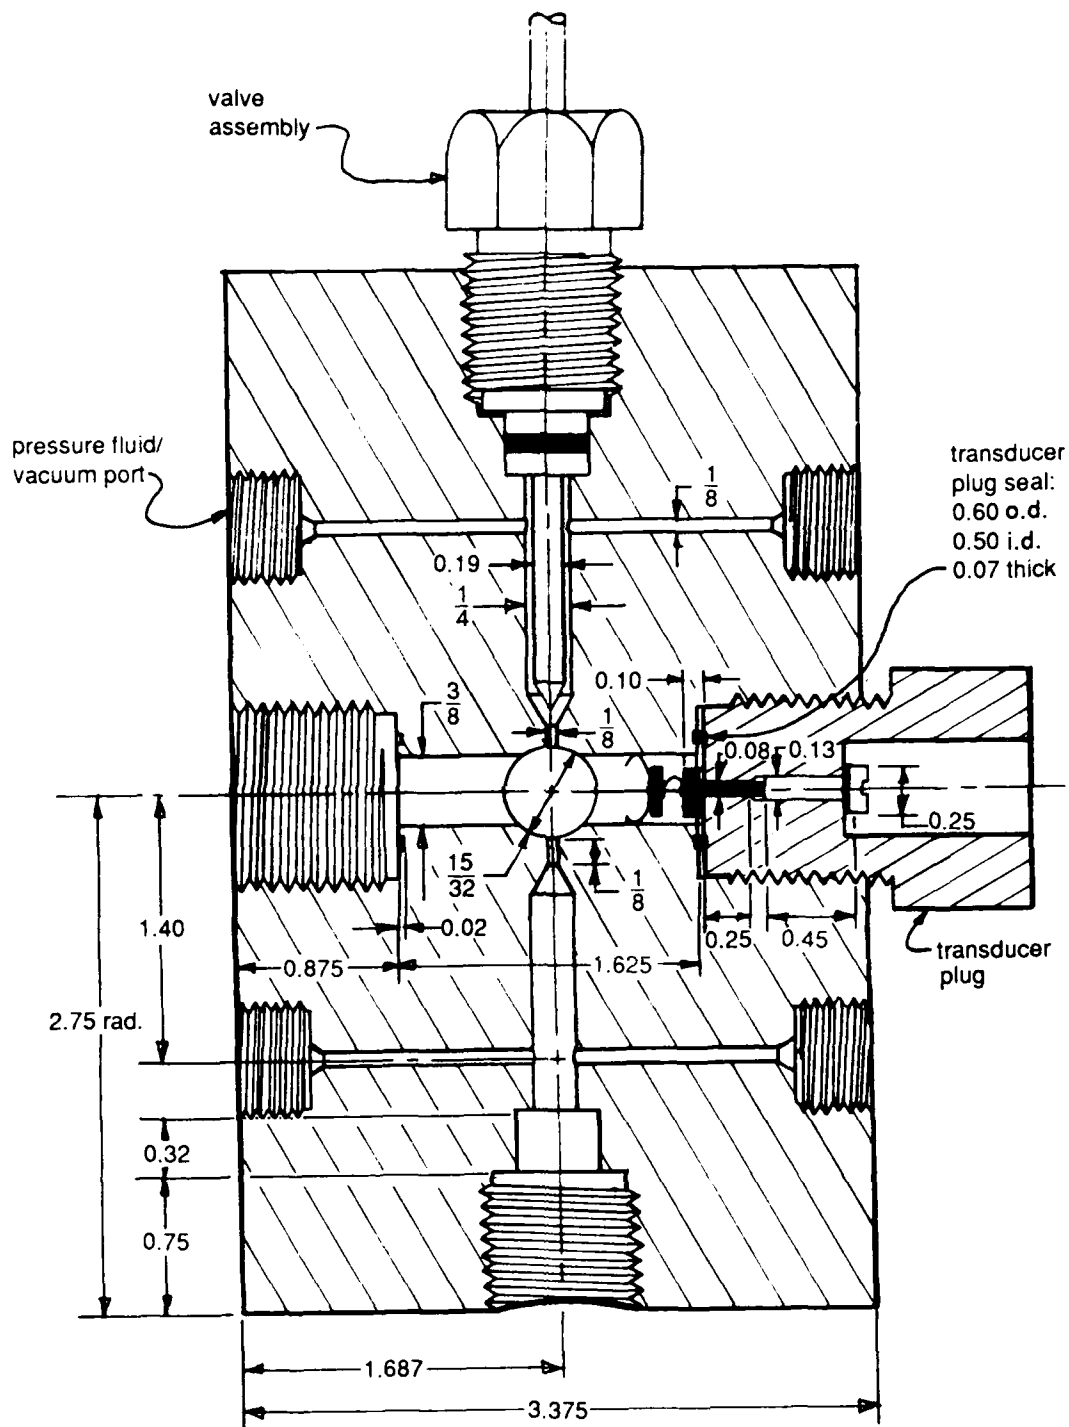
CROSS SECTIONAL VIEW OF CHAMBER SHOWING TRANSDUCERS AND VALVES.
